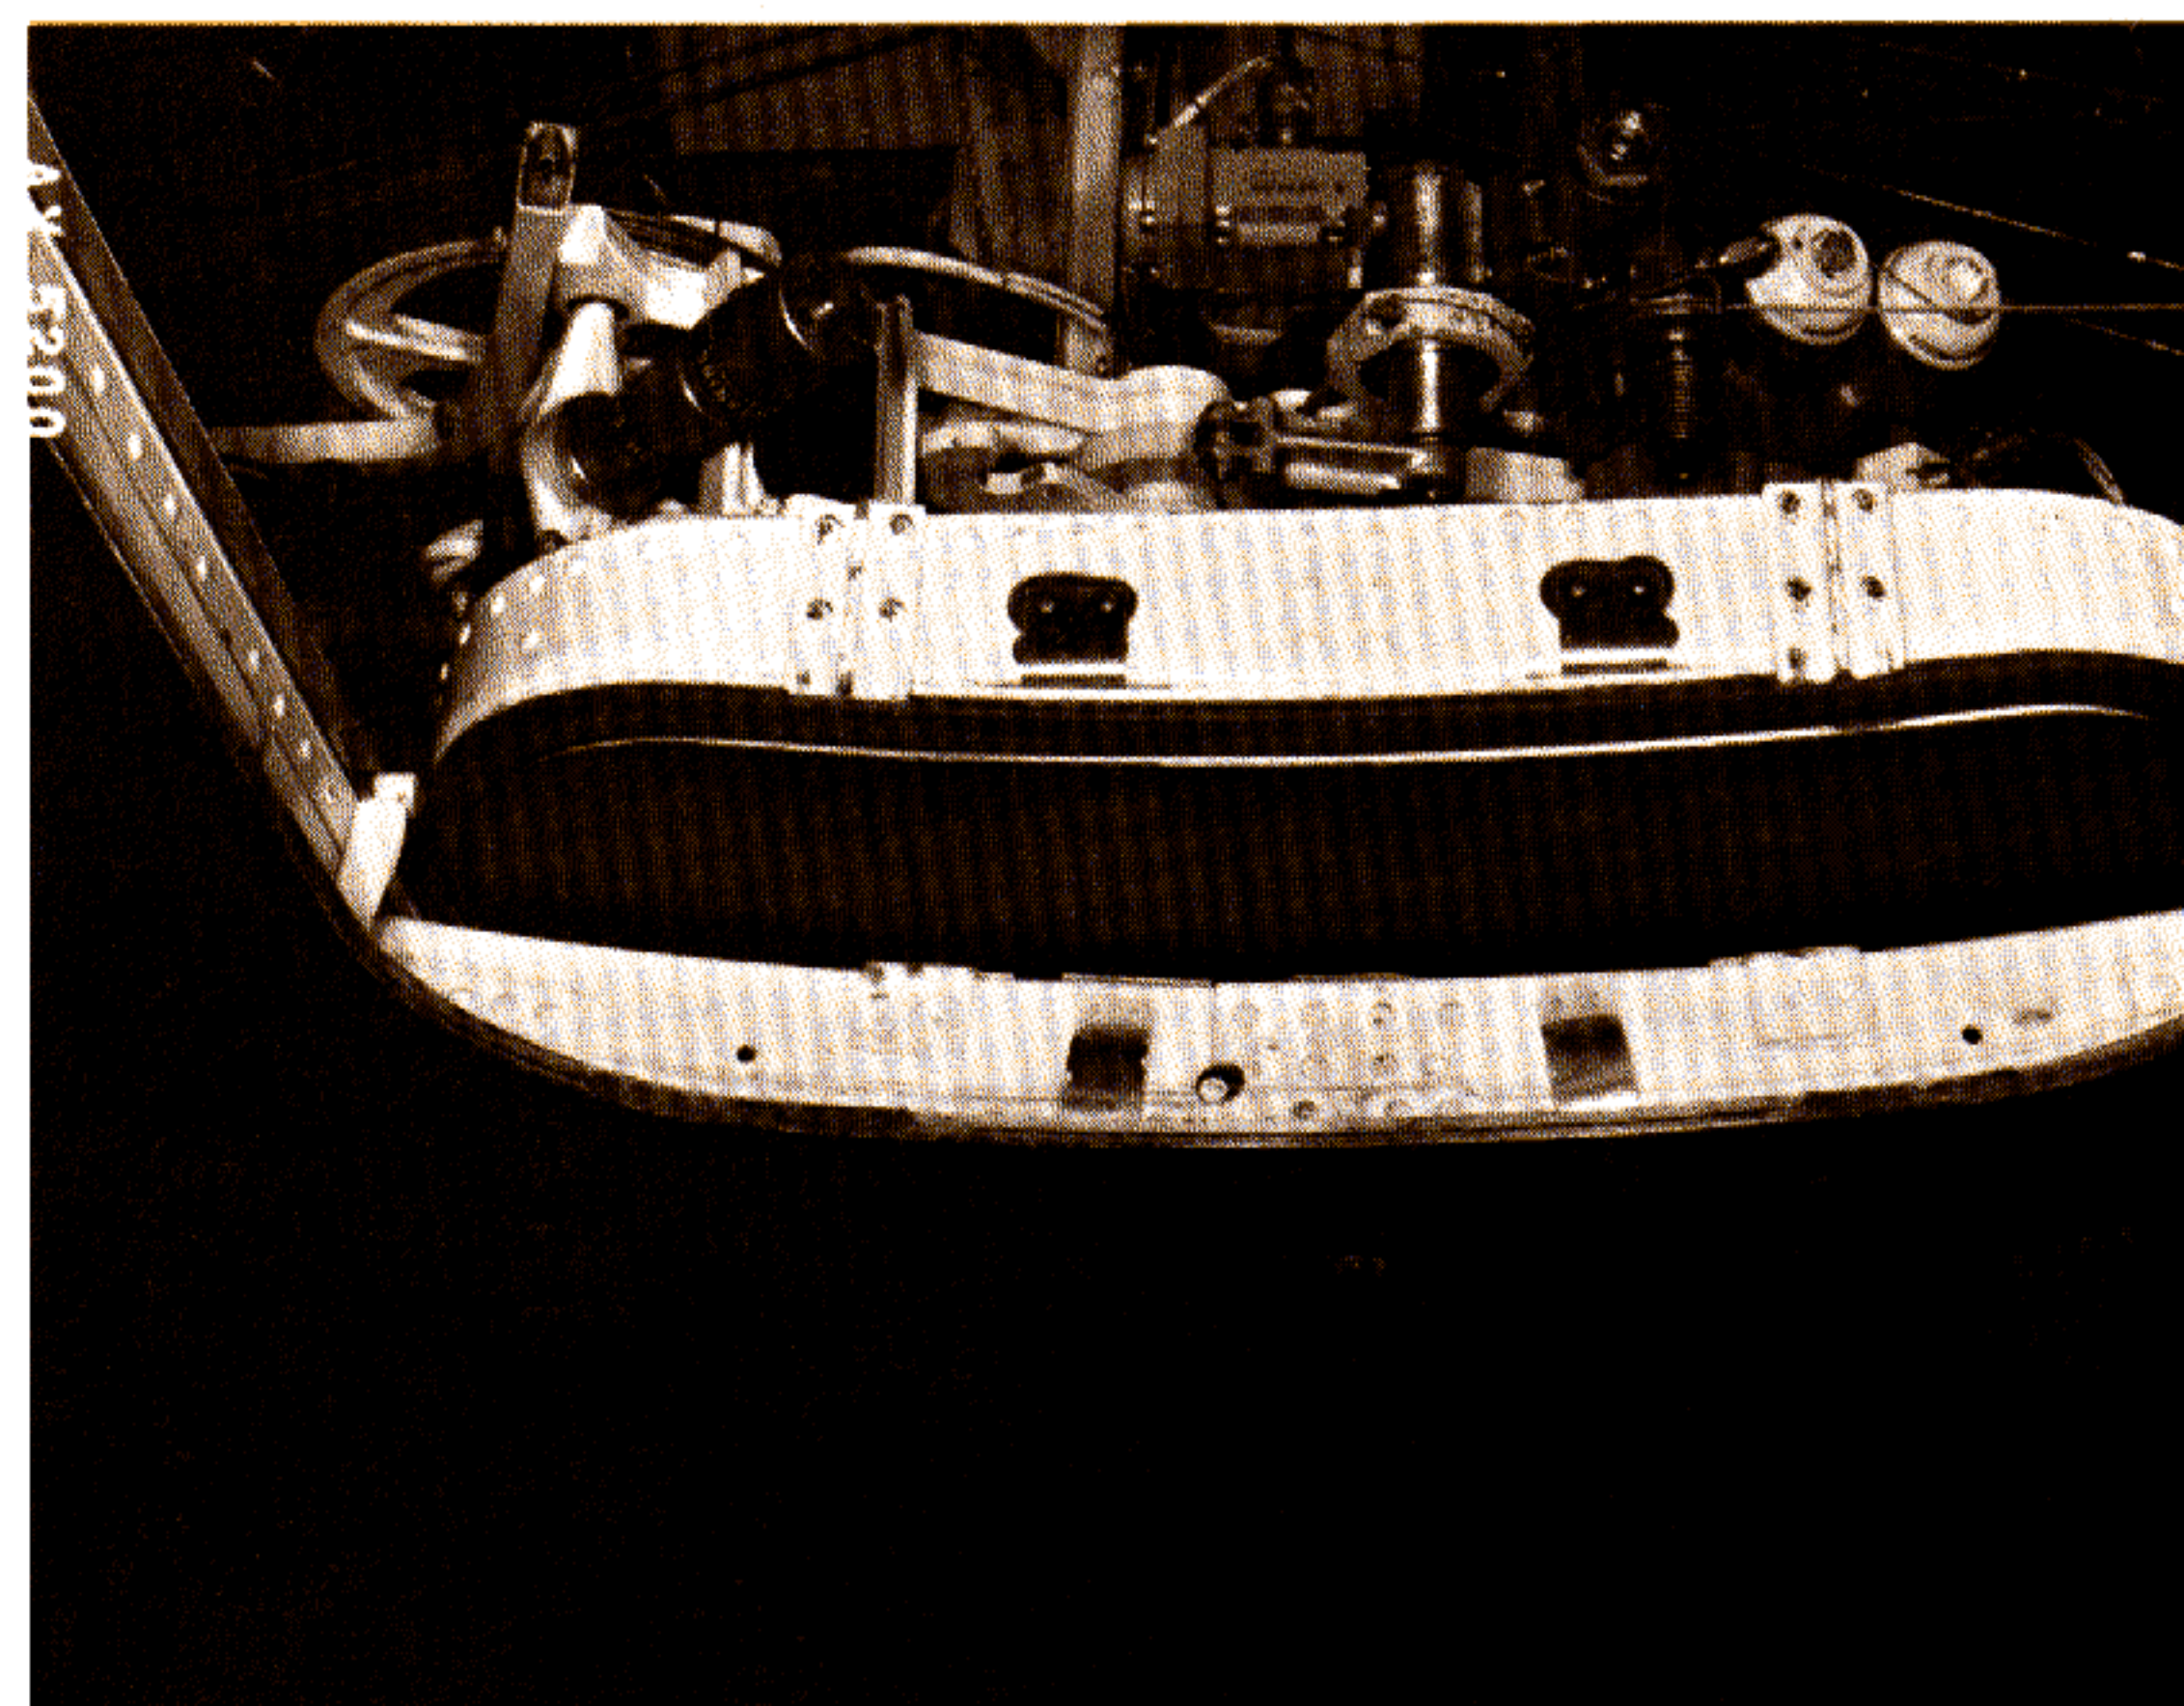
Rudder and Elevator Booster Installation — View looking forward
